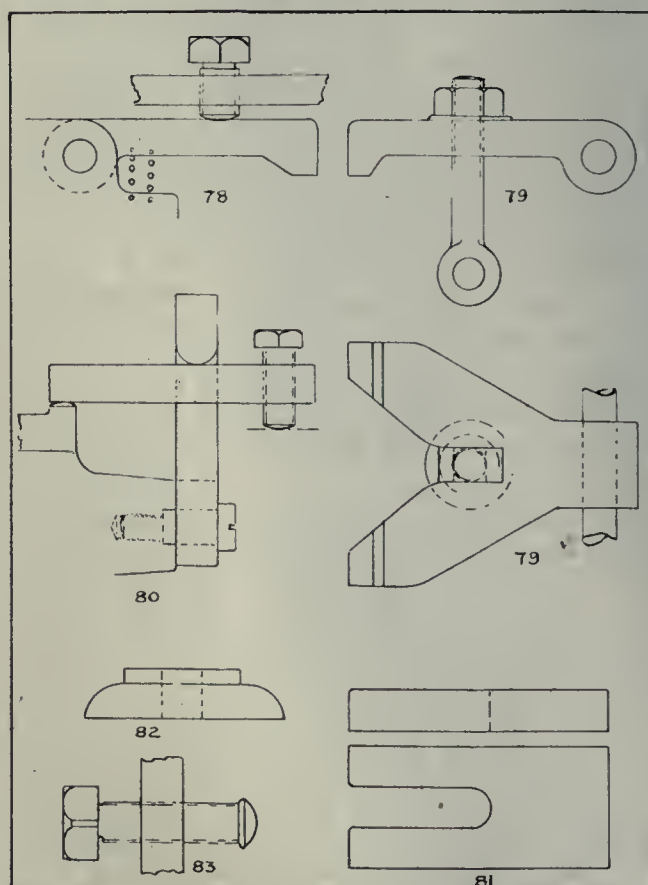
is a clamping device that may be utilised in close places. The clamp is pivoted, and the pressure is applied through the set screw, and, for convenience, the coiled spring is always holding the clamp up to the set screw, or in other words, prevents the clamp from falling.
